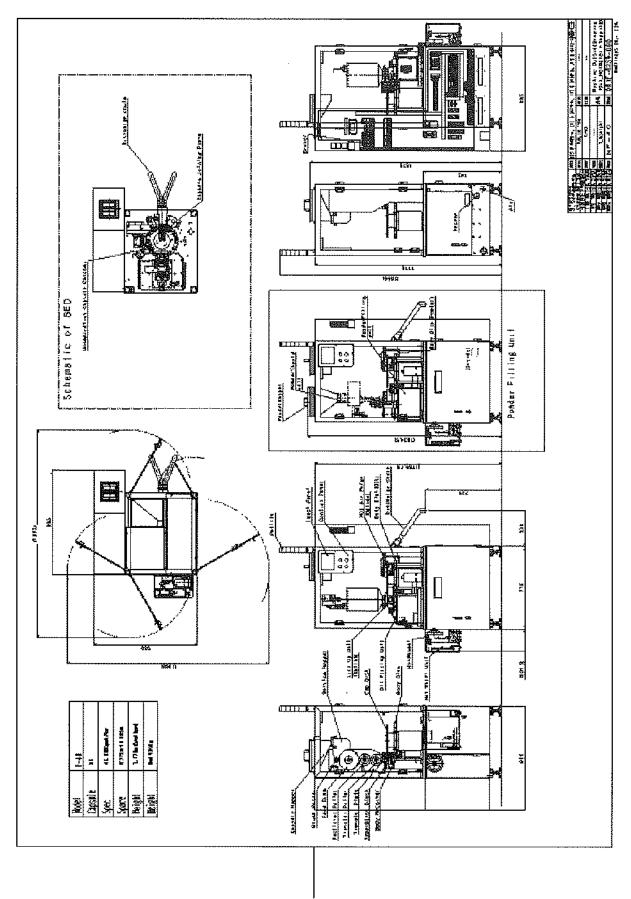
Machinery and Equipment Qualicaps Co., Ltd.
